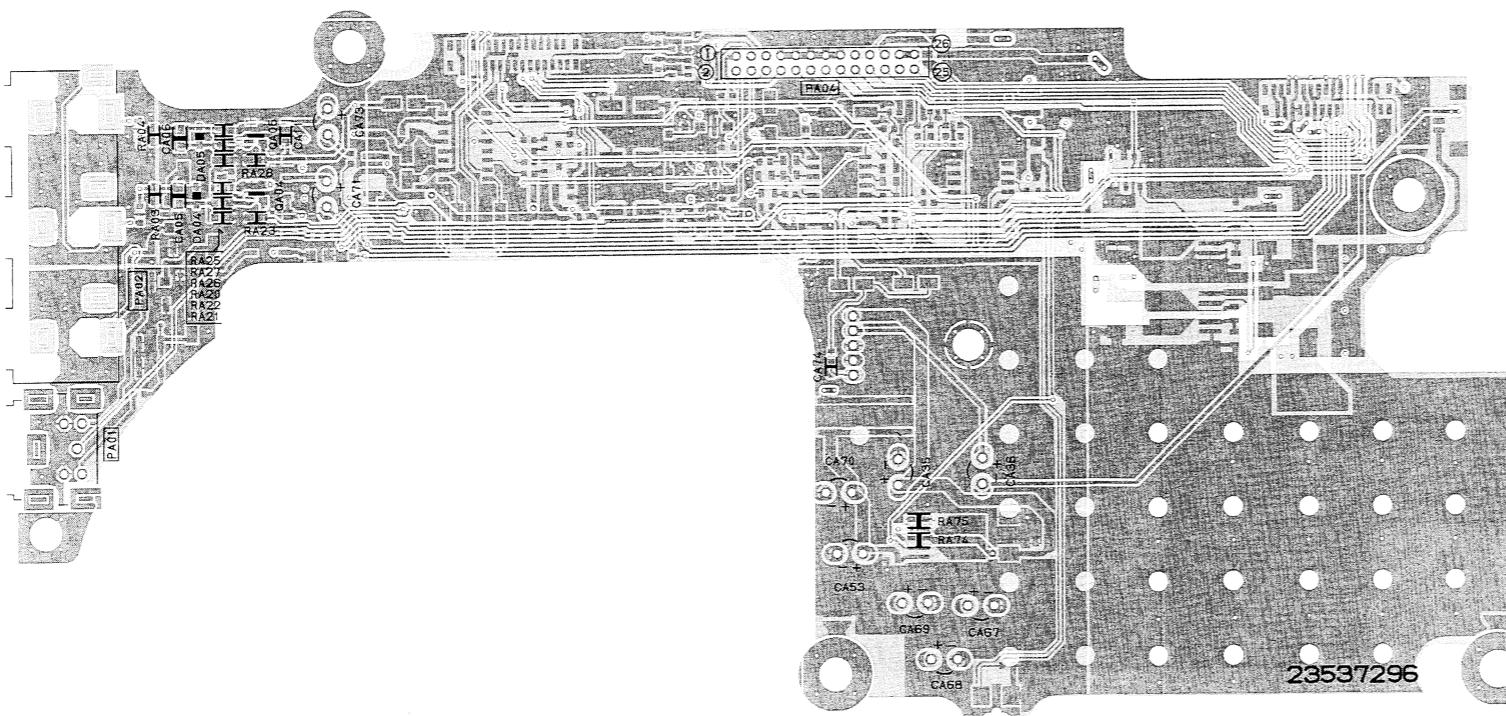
U0022 Input PC Board (Bottom Side)
